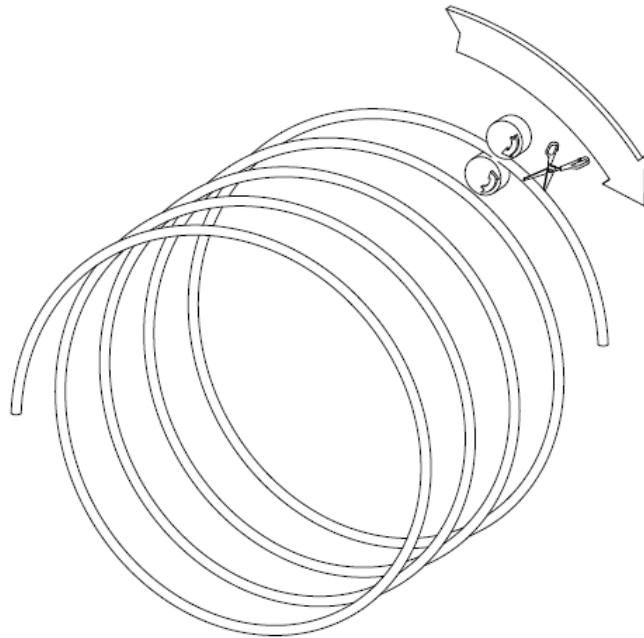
Illustration of the principle of moving the cutting tool along the circular shaped helical wire-loop
